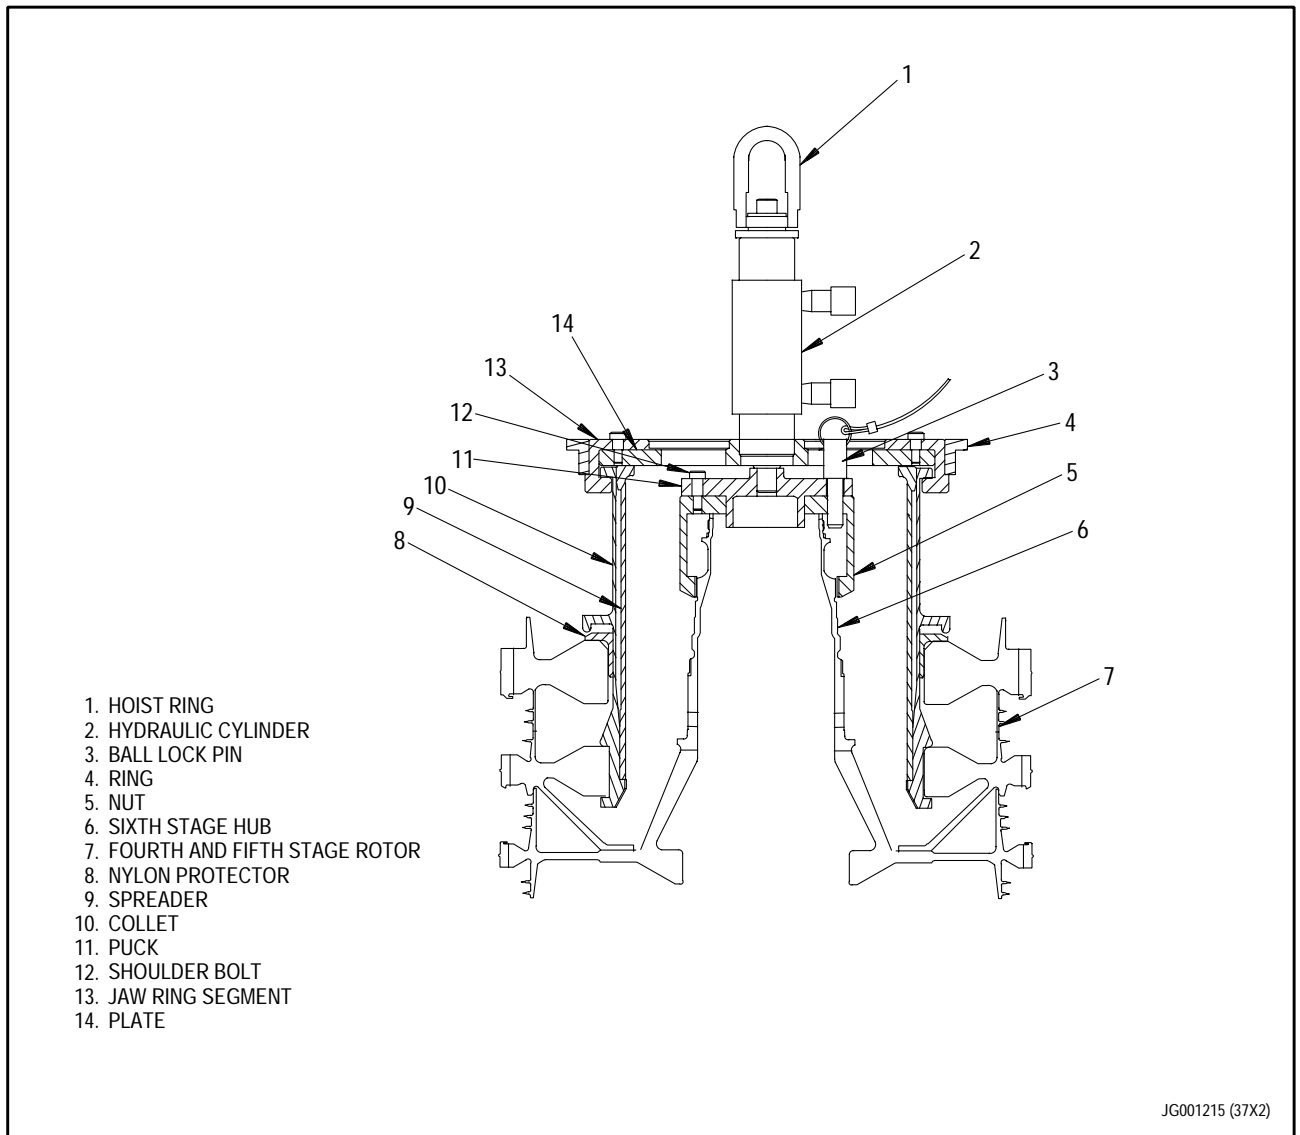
Removal of Fourth and Fifth Stage Rotor with PWA 57604 Pusher/Puller
